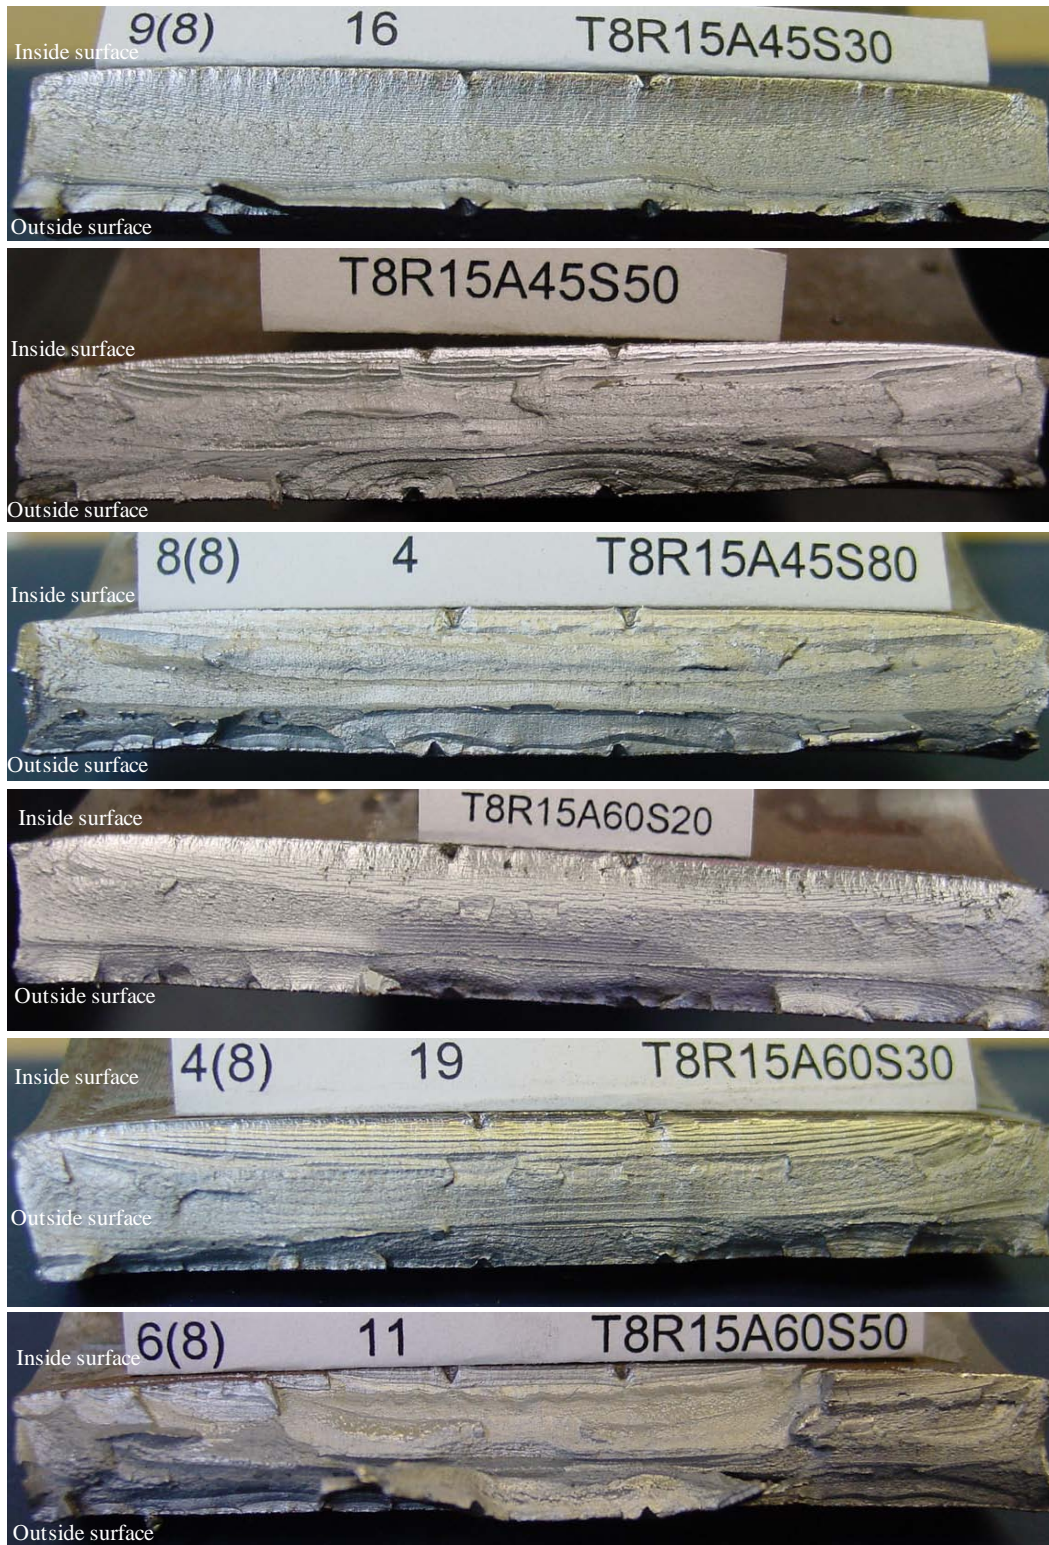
Pictures of fracture surface: strip specimen series of T8R15
